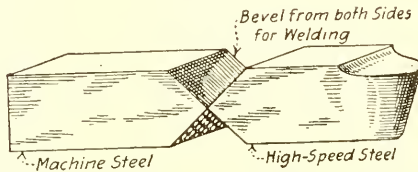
Presto-O-Lite Tool Welding Practice.
